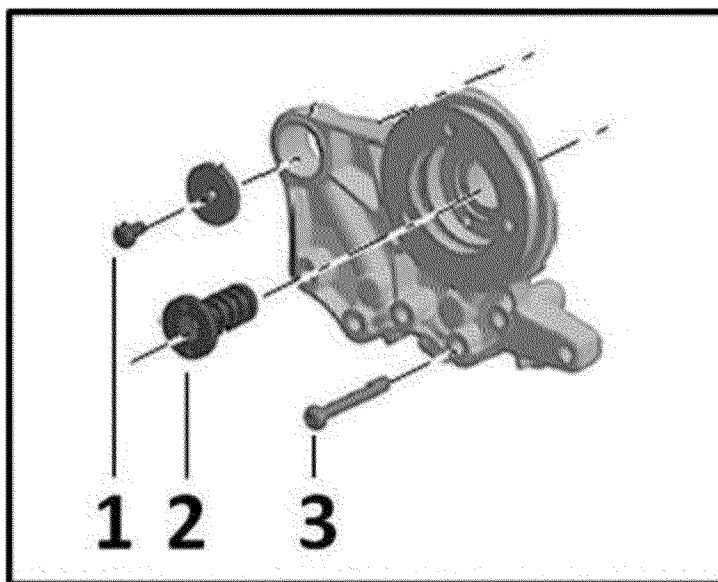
(1) Replace bolt. (2) Control valve. (3) Bolt.
